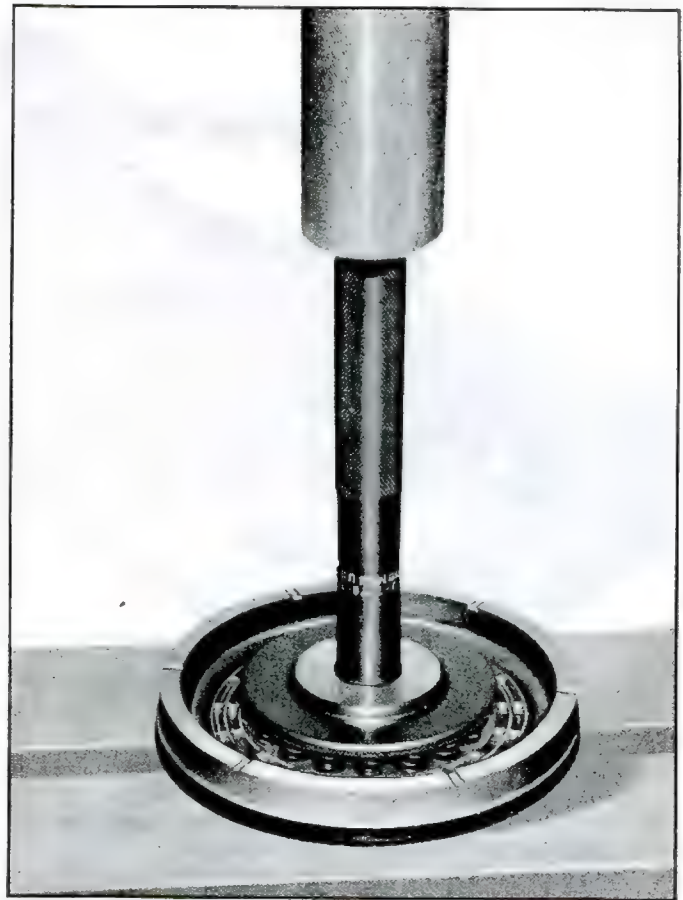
E-42—Installing Rear Pump Body Bushing with J-8360-4 and Handle J-7079-2
